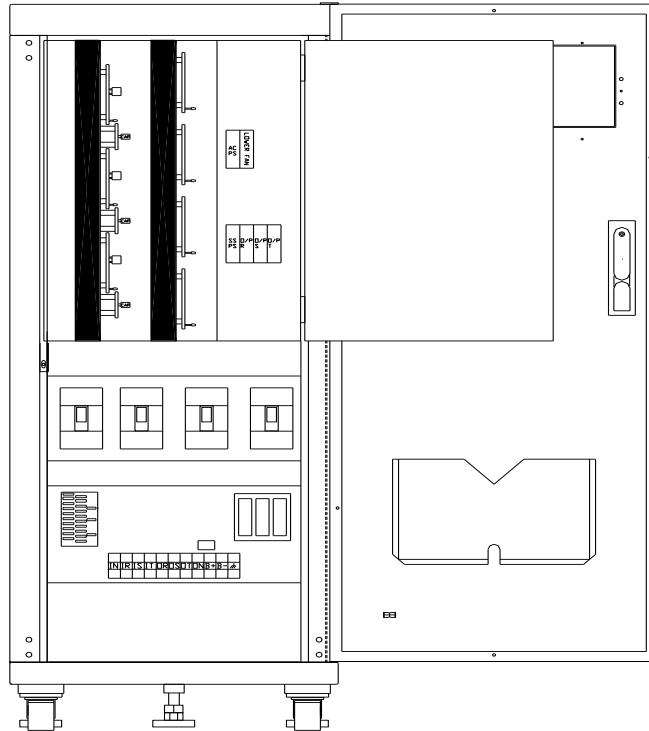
Front view of system with Door Open, PCB Module Fully Open and Terminal strip cover off
